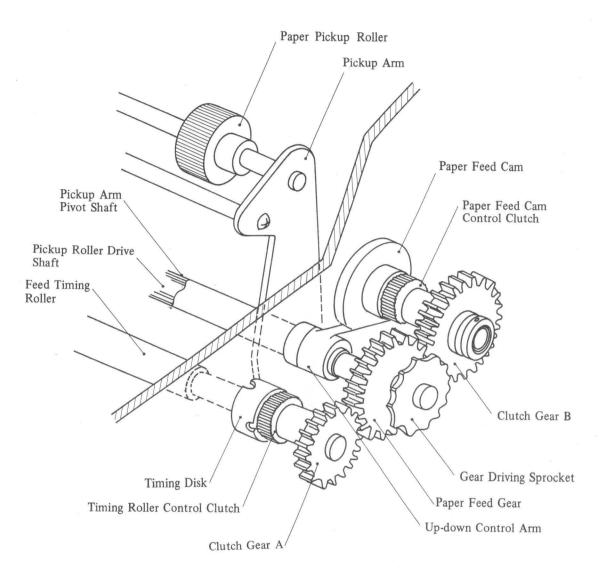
Paper Pickup Roller Assembly Main Components
